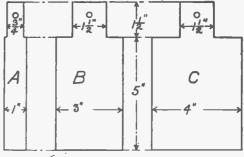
DIMENSIONS OF CARBON AND ALUMINUM PLATES
